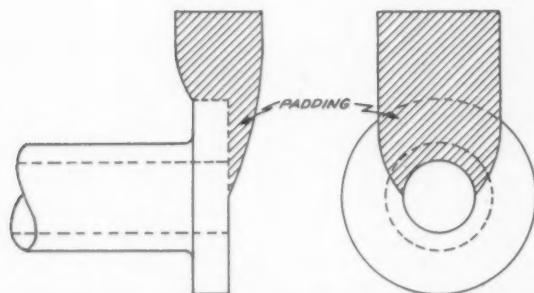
SKETCH OF VALVE FLANGE MADE WITH AN OPEN RISER.
